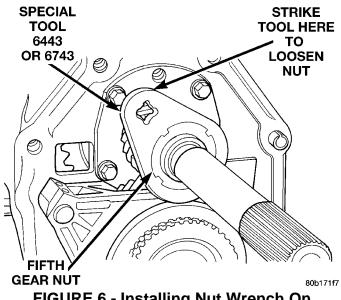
Installing Nut Wrench On Mainshaft Fifth Gear
